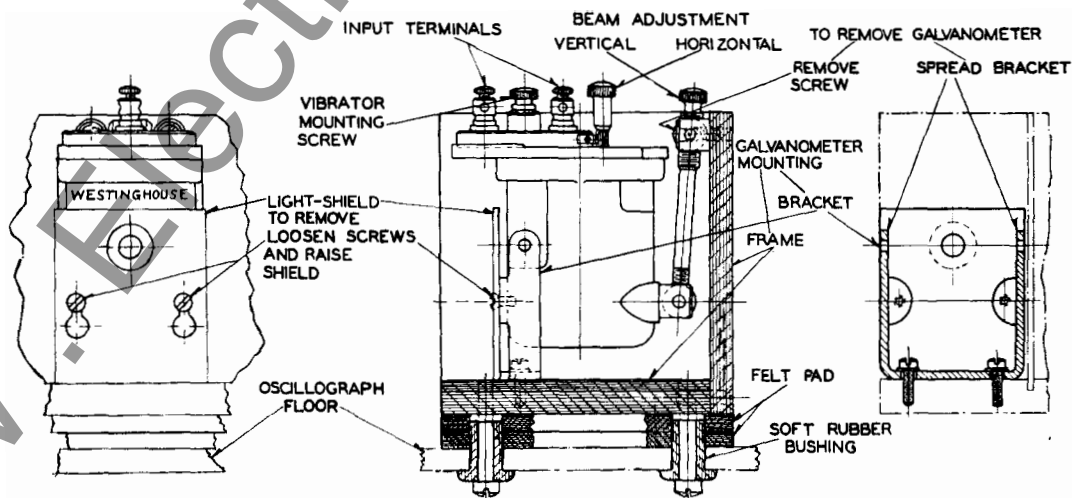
THREE CUT-AWAY VIEWS OF THE COMPLETE GALVANOMETER SHOWING DETAILS OF THE MOUNTINGS.
